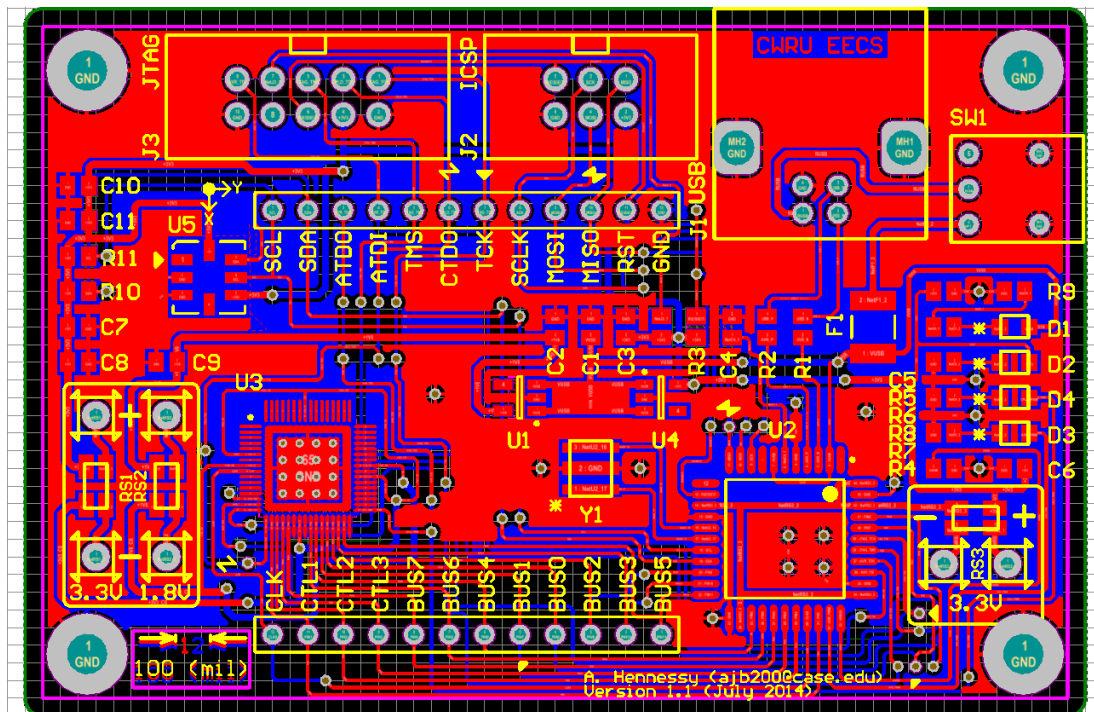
The PCB layout of the purpose-designed board in Altium Designer.
